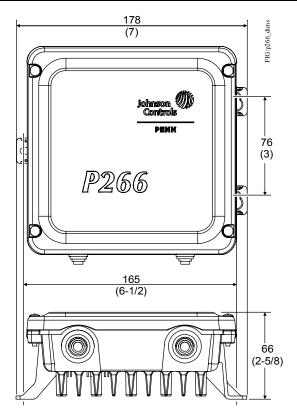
P266 Single-Phase Condenser Fan Speed Control Mounting Dimensions
